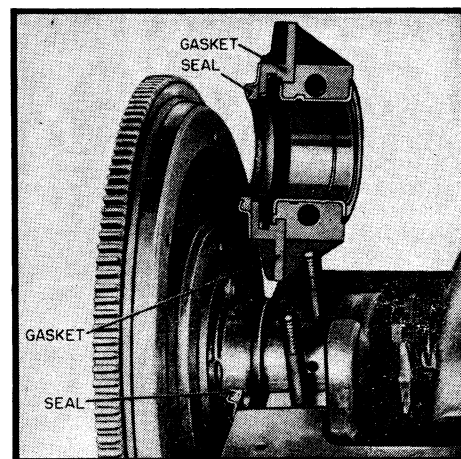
Crankshaft rear oil seals. Six-cylinder engines
